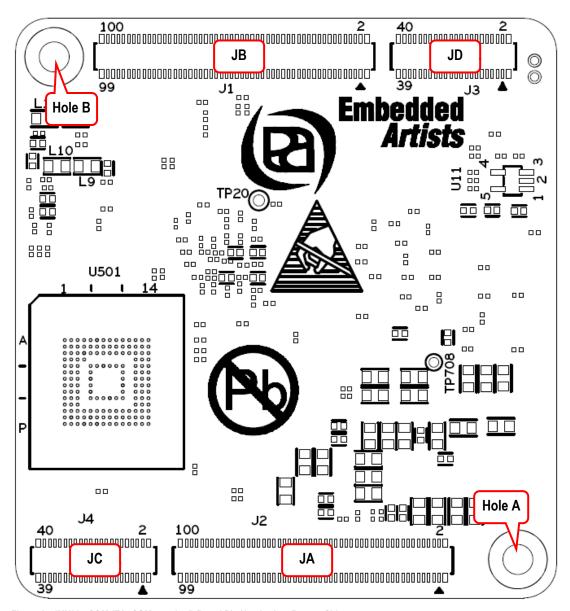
iMX93 uCOM (EAuCOM standard) Board Pin Numbering, Bottom Side
